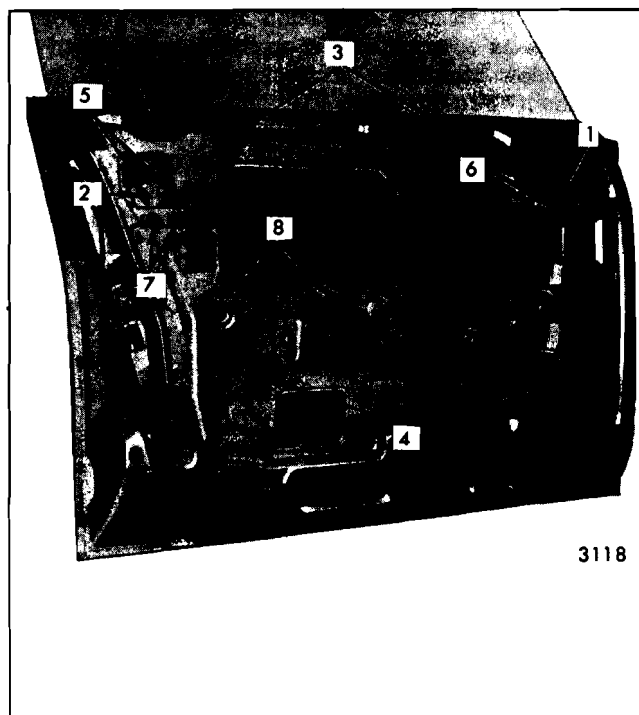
Window Removal and Adjustment - "B-39" and "C-39, 49 and 69" Styles
